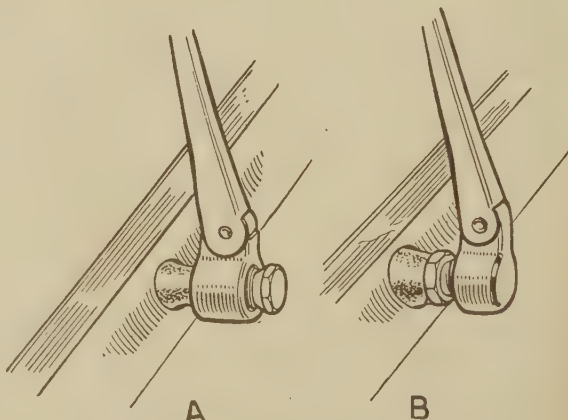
Illustrating Two Methods of Fixing the Lucas Wiper Arm and Blade to the Wiper Spindle.
